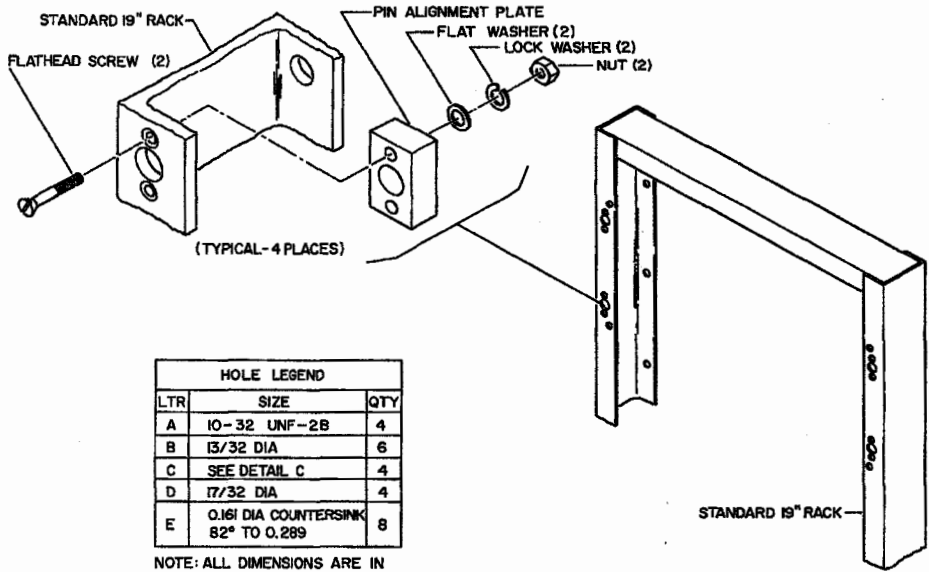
Pivotal Slide Mount, Rack Type Mounting.
